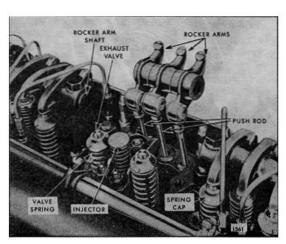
Location of Exhaust Valves (Two-Valve Cylinder Head)
